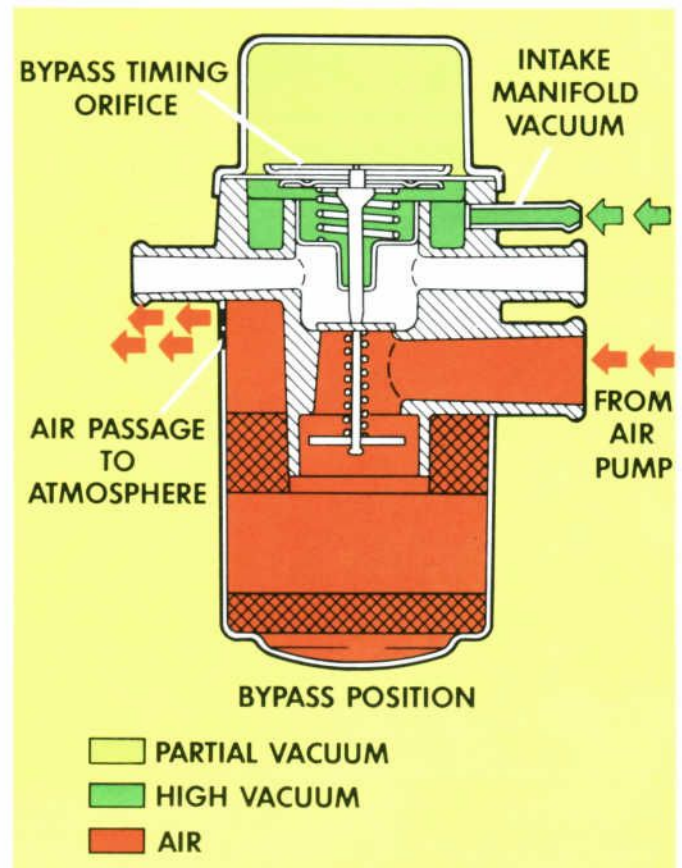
AIR BY-PASS VALVE (BY-PASS POSITION)
